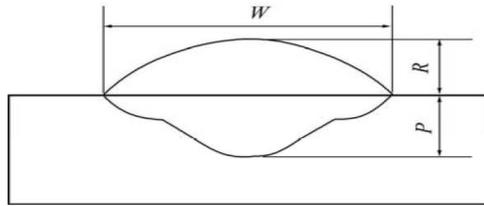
Weld bead geometry of underwater wet FCAW [2].
